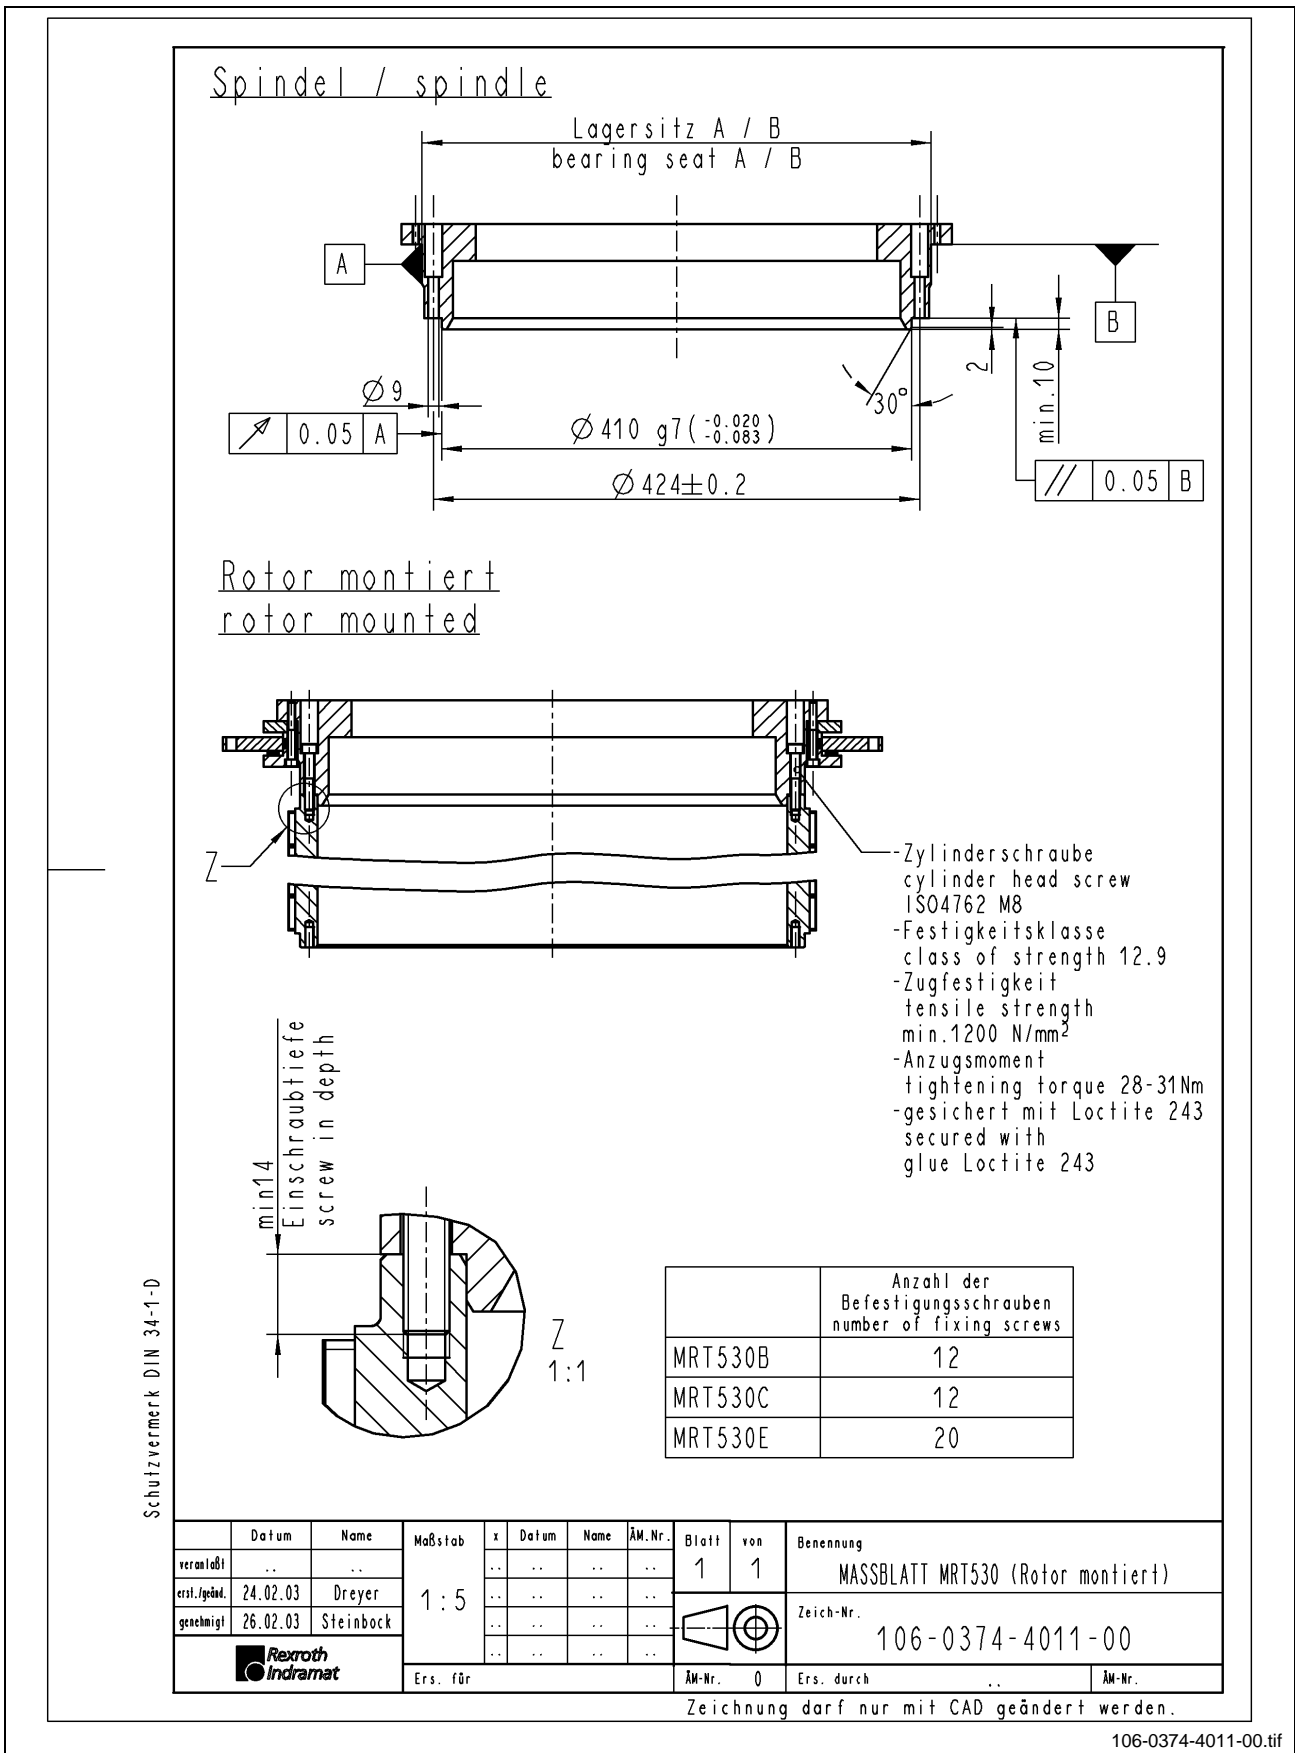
Dimension sheet Rotor MRT530, mounted
